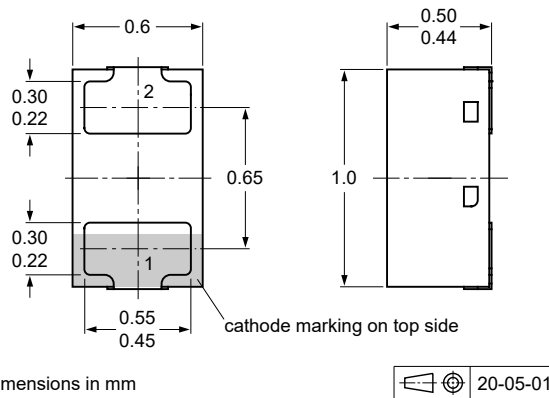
Package outline DFN1006BD-2 (SOD882BD)
